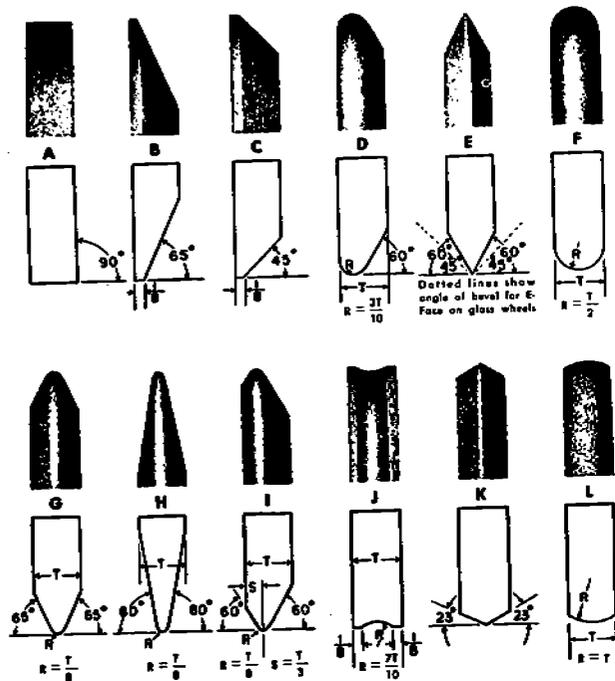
Wheel face shapes for straight wheels, available from manufacturers. (Bay State Abrasives, Dresser Industries.)
